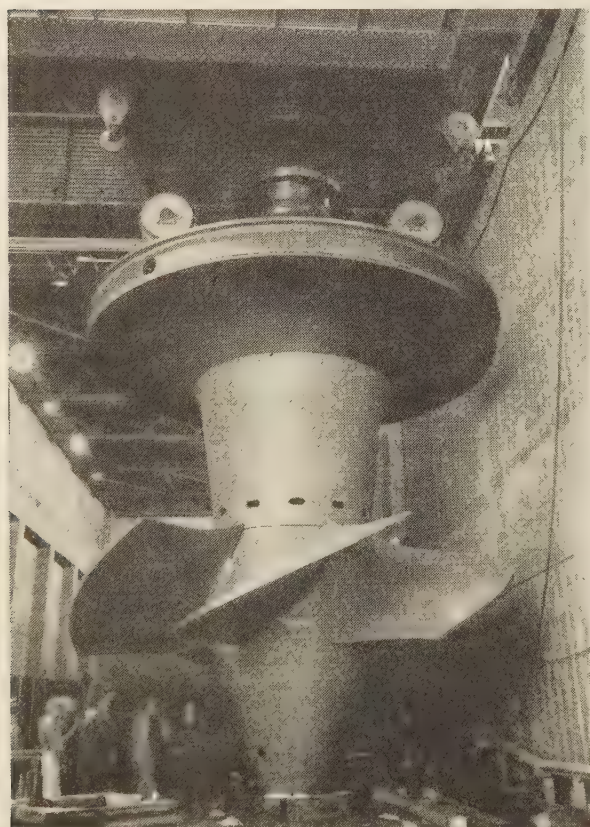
HEAD COVER AND RUNNER ASSEMBLY; PICKWICK LANDING
